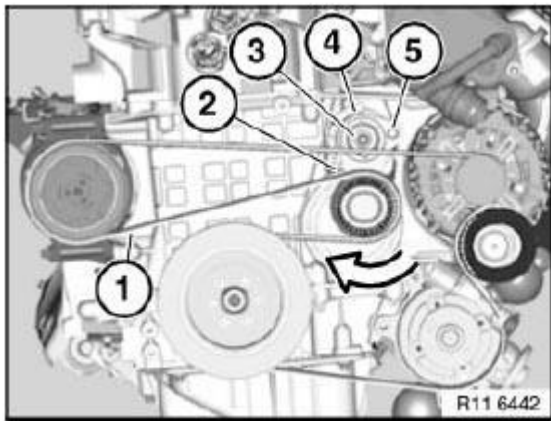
Belt Tensioner And Belt Tensioner Screw
